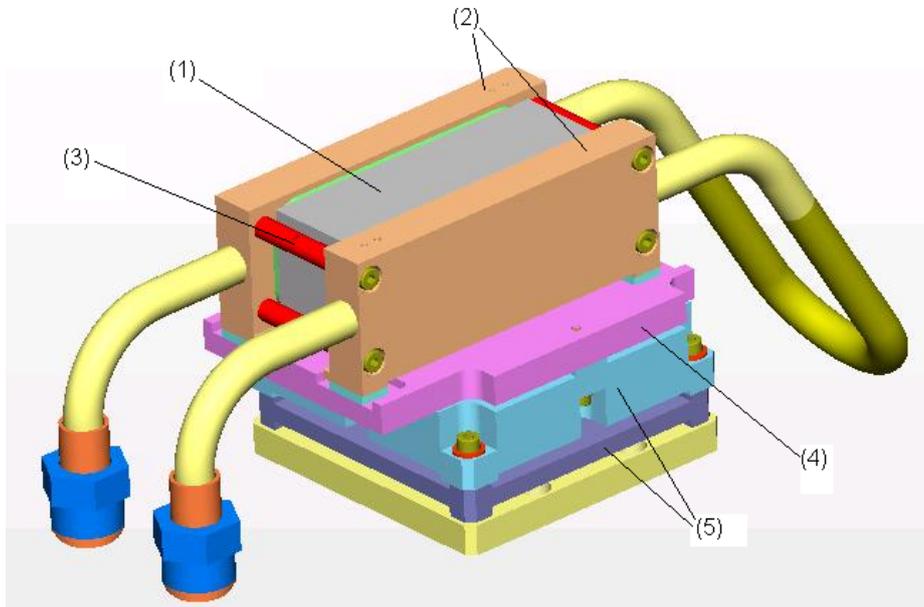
Example of ESRF first crystal assembly: (1) silicon crystal; (2) copper cooling blocks with internal fins; (3) invar clamping rods; (4) invar base plate; (5) ceramic insulating plates
